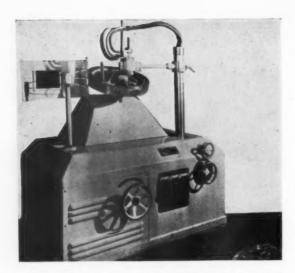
Welding bronze wormwheel rim to cast iron centre on electric arc welding machine.
